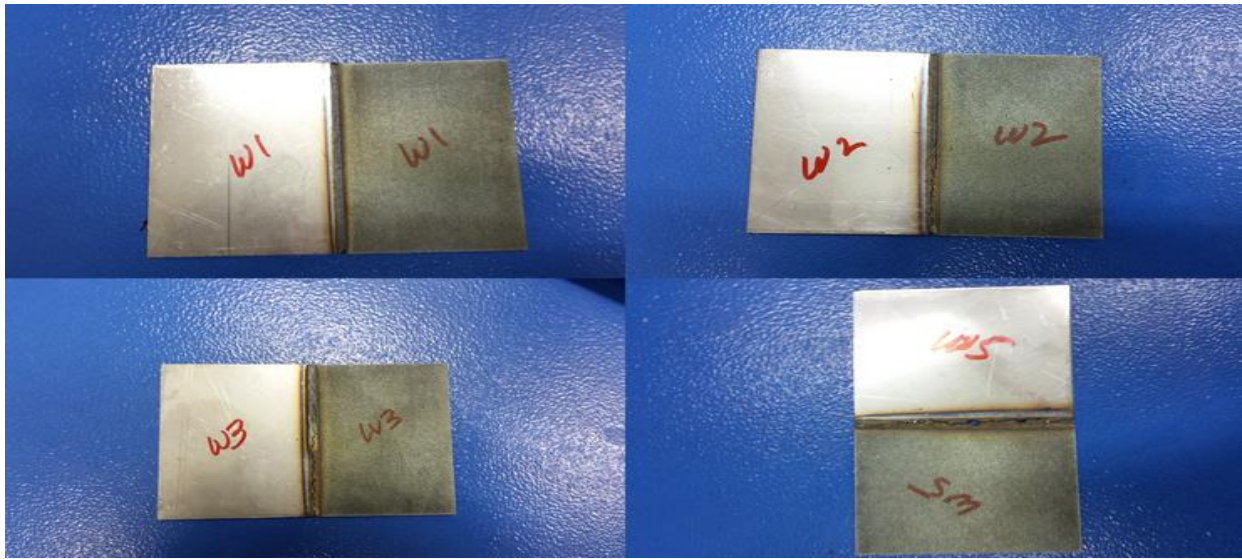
Laser welding of SS-Ti without filler
